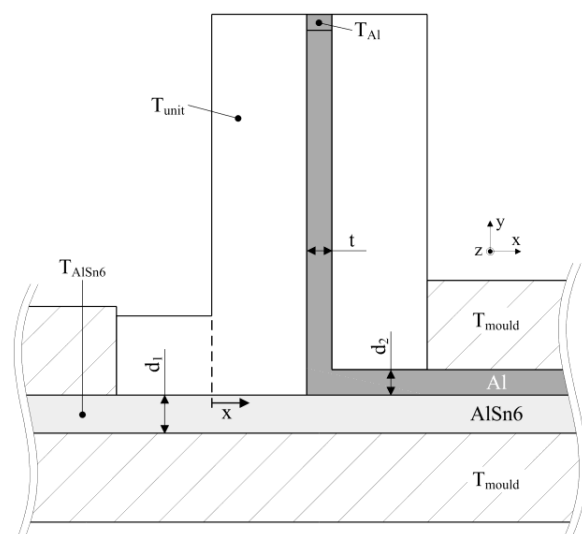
Geometrical details of the composite casting mould used in the simulations
